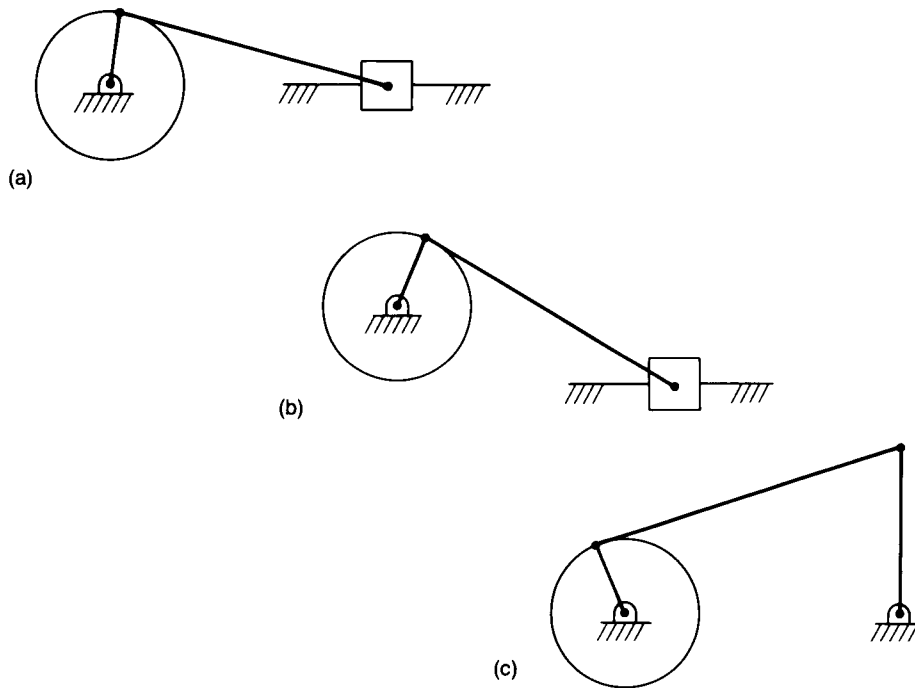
Three mechanisms to produce one-dimensional displacement: (a) an in-line slider crank; (b) an offset slider crank; (c) a crank rocker.
